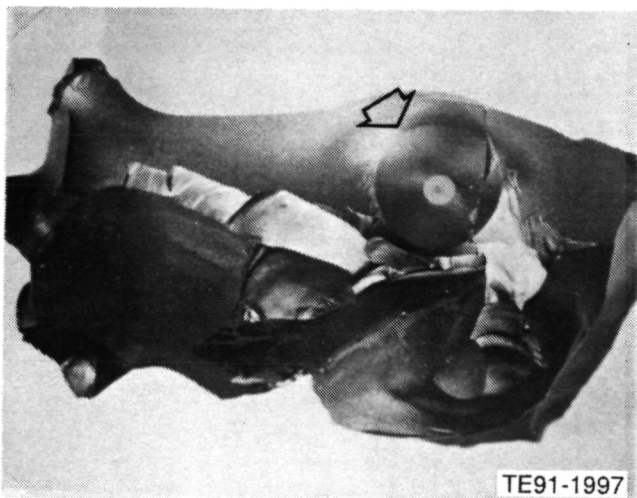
Section of CBO HIPed α -SiC burst rotor (FX78519). Initial failure site is circular crack (see arrow).
